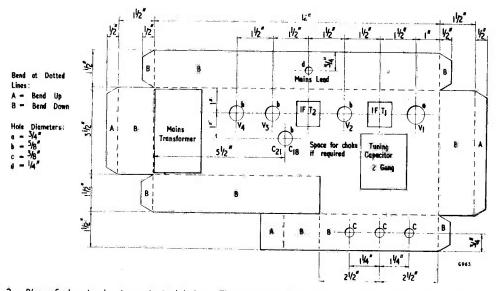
Plan of chassis showing principal holes. The positions of the remaining holes, for component mounting, grommets, etc., may be judged from Fig. 4. Holes are also required for the tuning drive spindle
